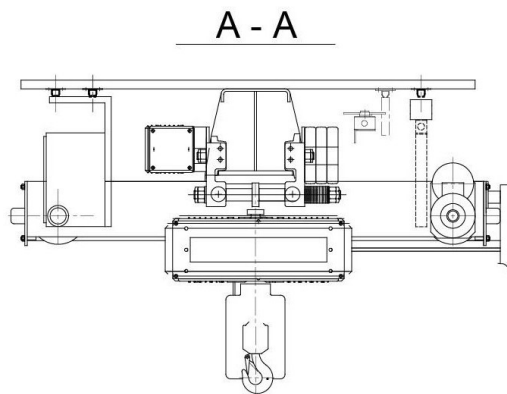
Cross-section of the welded girder and the trolley (A – A section)
